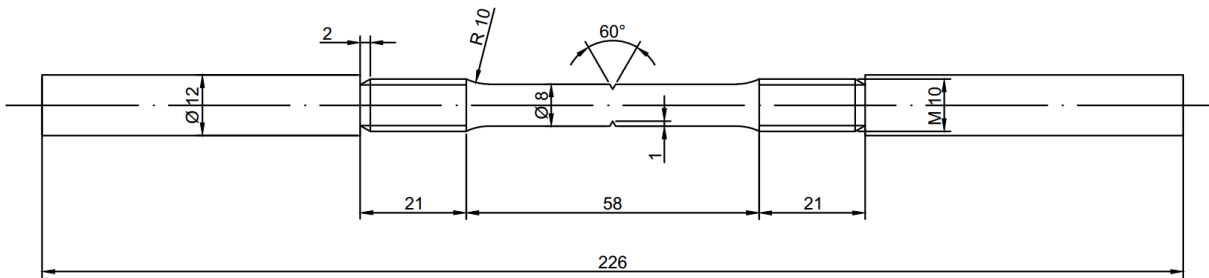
Technical drawing of round bar test specimen for dynamic fracture toughness
